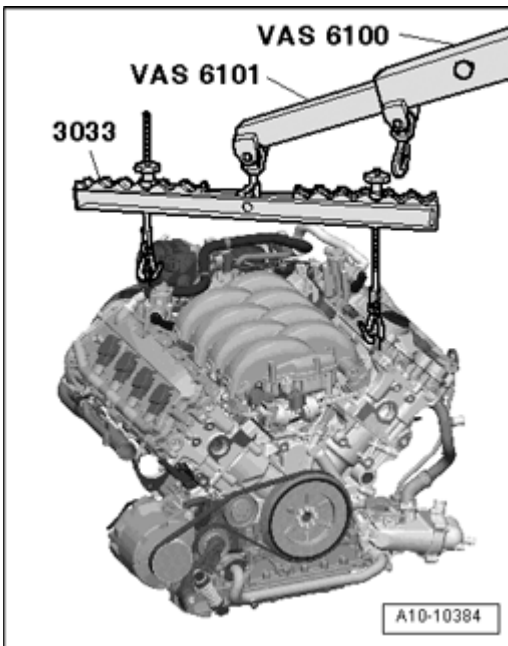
Engaging Lifting Tackle 3033 On Engine Lifting Eyes And On Shop Crane VAS 6100 With Lift Arm Ext./Workshop Hoist VAS 6101
